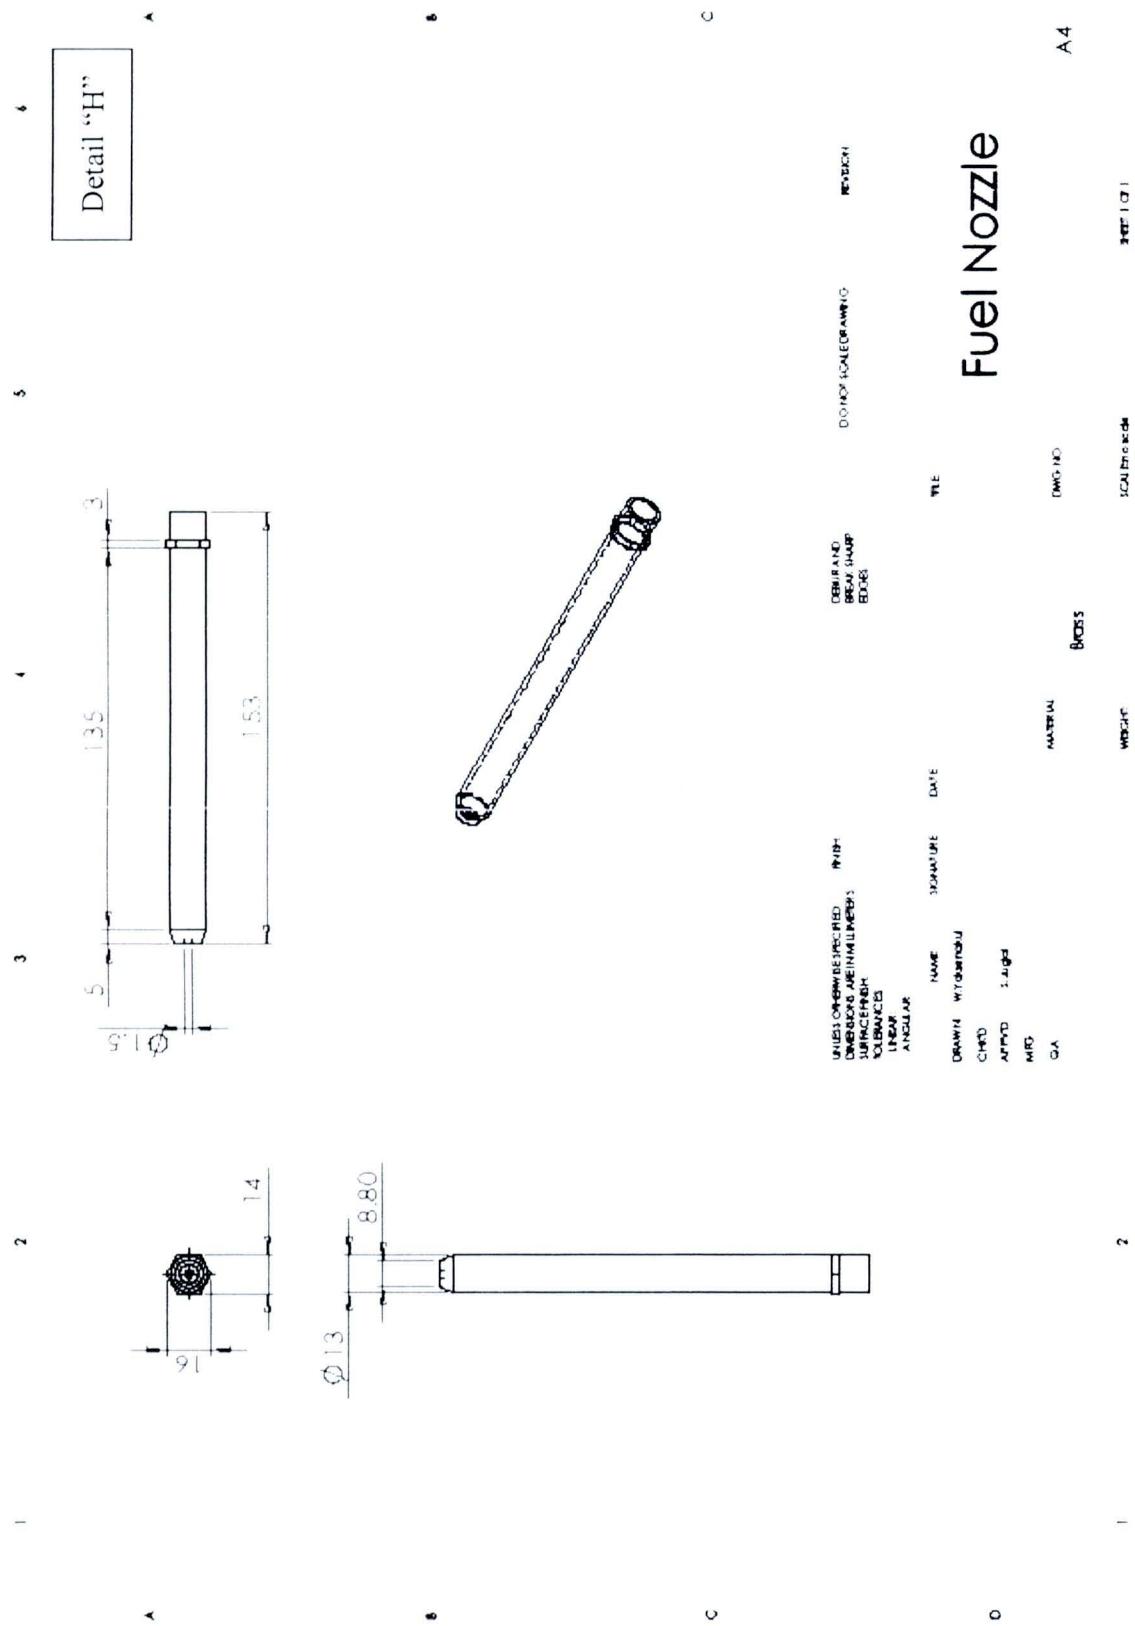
Drawing of gas fuel nozzle (SPMB).
